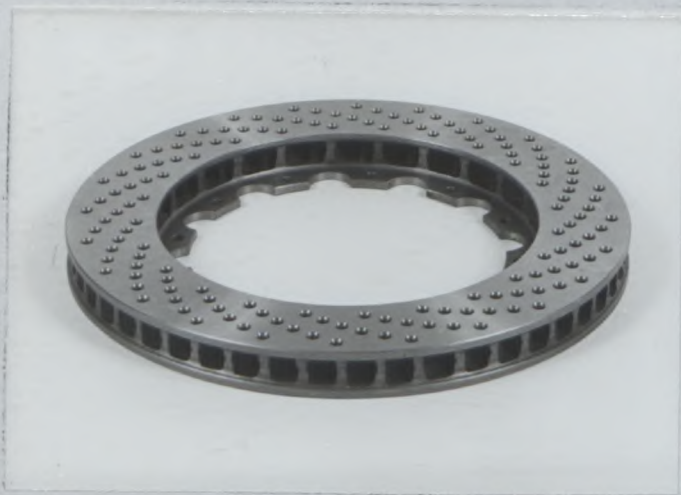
FRONT AND/OR REAR BRAKE DISC,
